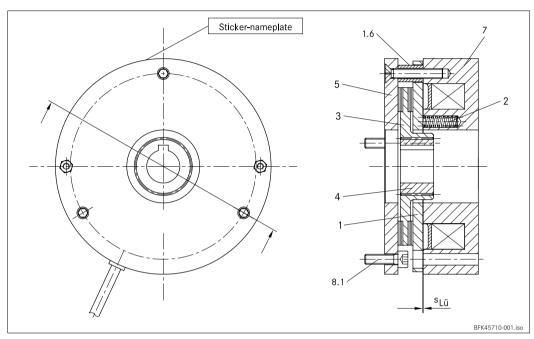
Spring-applied brake BFK457-01...16 Compact, completely mounted with rotor and flange
